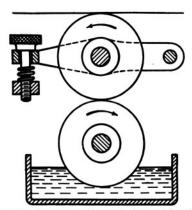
A type of trimming mechanism that is much in use in sheet-mounting machines and gumming machines. This type is easily cleaned and adjusted. When the rollers are long, consideration should be given to the deflection in the center of the rollers due to the pressure exerted in squeezing out glue. This deflection will result in a thicker film of glue in the center of the rollers than at the ends. This is usually compensated for by making the glue roller larger in diameter in the center than at the ends. The device has no trimmer blade, but thickness of glue film is regulated by adjusting the gap between the rollers.
